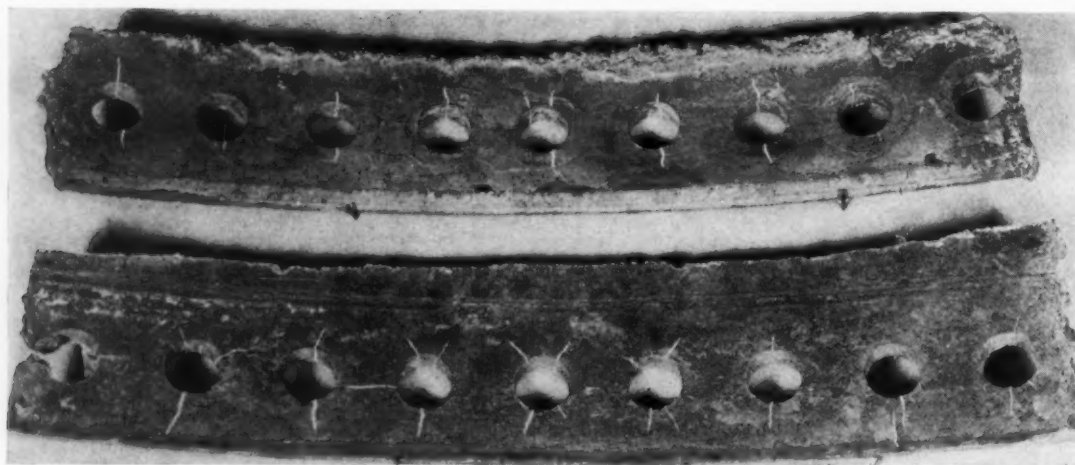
TYPICAL EXAMPLE OF CAUSTIC-EMBRITTEMENT CRACKS IN GIRTH SEAM OF HORIZONTAL TUBULAR BOILER
